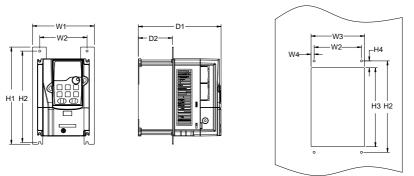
Flange mounting for 380V 1.5-75kW VFD models
